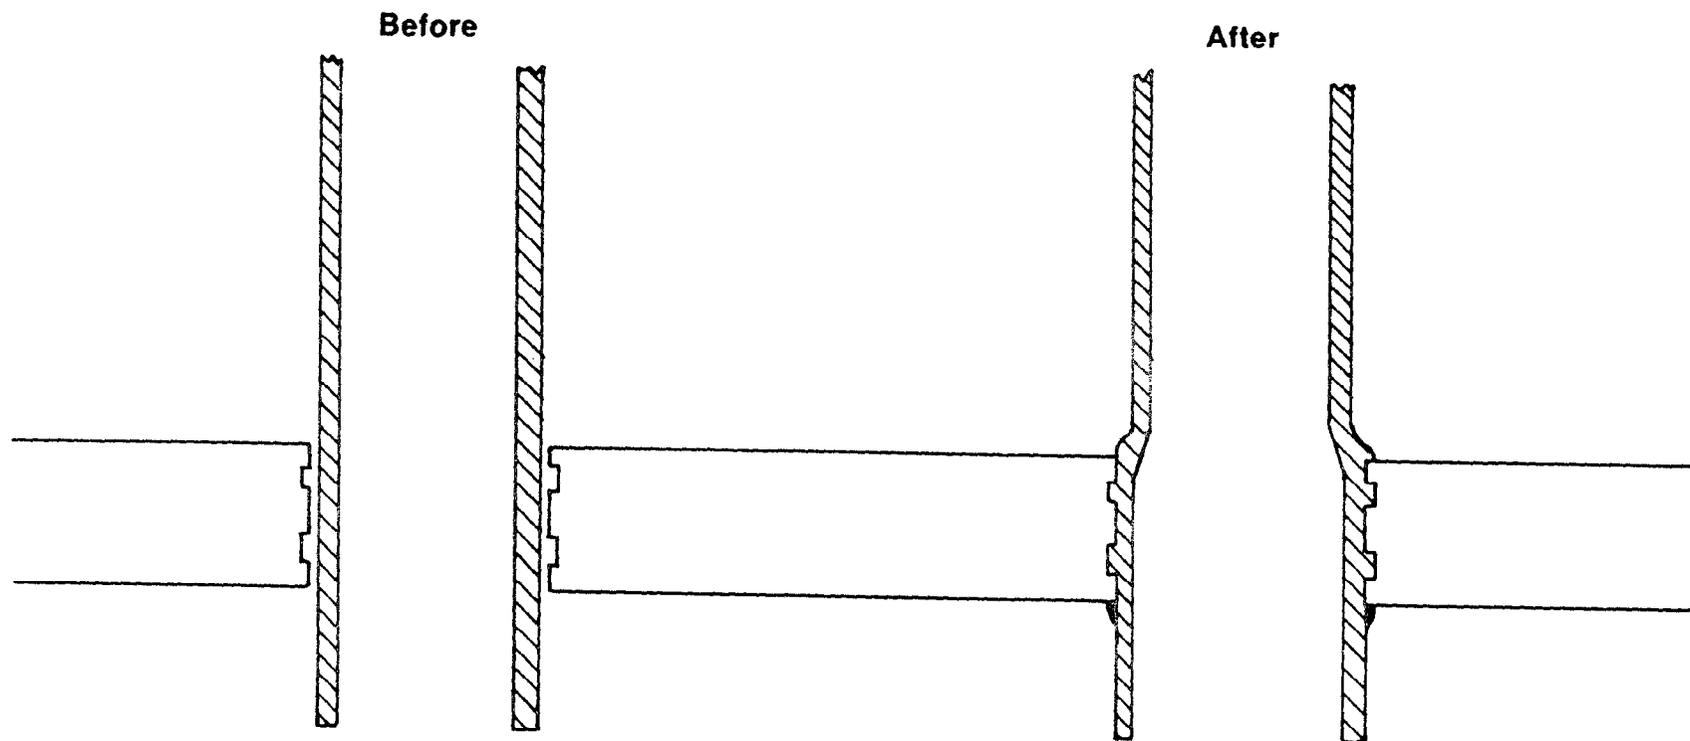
The roller expanding process for joining tubes to a thick metal plate. The left tube is shown slip fit into the hole. The right tube is shown after the roller expansion operation.
